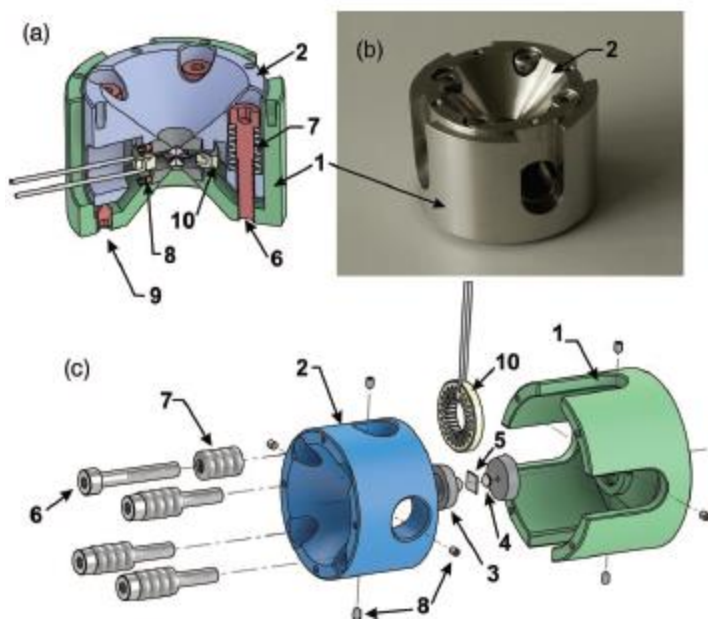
BX90 diamond anvil cell design. *a* – Section view, *b* – photograph of a loaded cell, *c* – exploded view. 1 – Outer cylinder part, 2 – inner piston part, 3 – diamond supporting plates, 4 – diamond anvils, 5 – metallic gasket, 6 – M4 (#8-32) screws for generating loading force, 7 – pack of conical spring washers (Belleville springs), 8 – setscrews for diamond anvils alignment, 9 – safety setscrews, 10 – optional miniature resistive heater [105].
